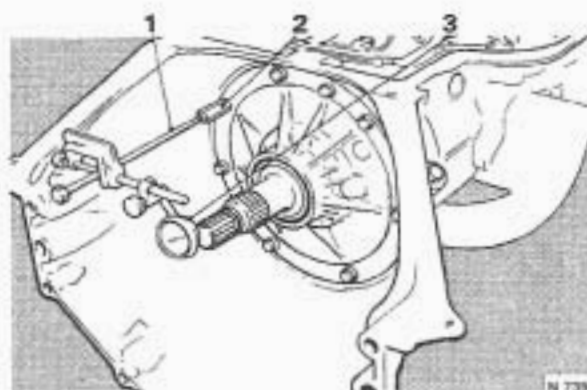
CHECKING THE FRONT UNIT END FLOAT
